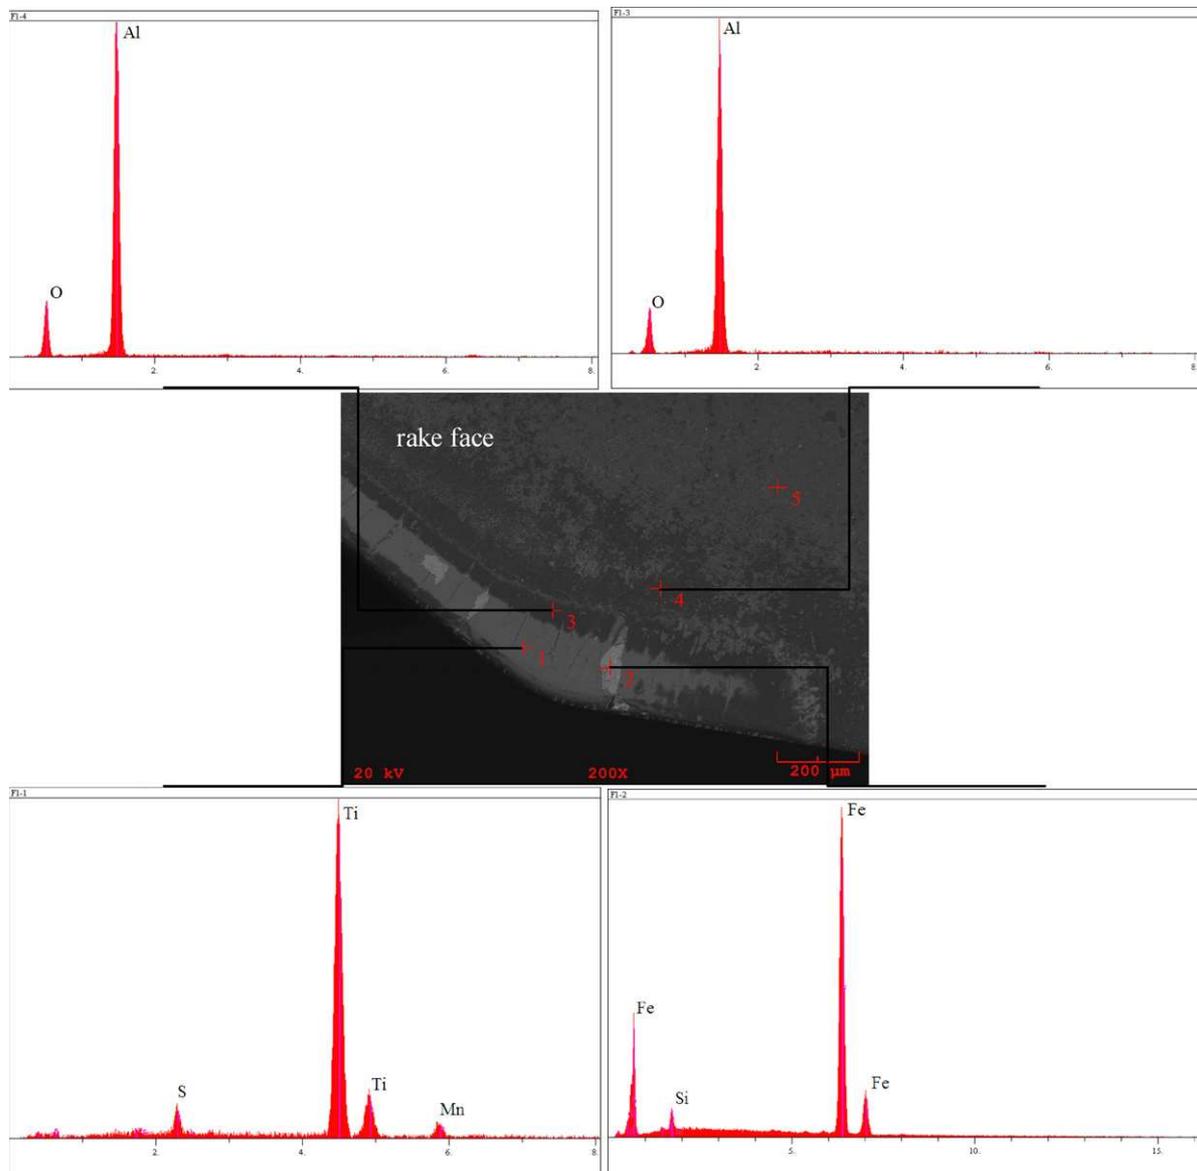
EDX spectra of tool rake face after machining material A at 600 m/min.
